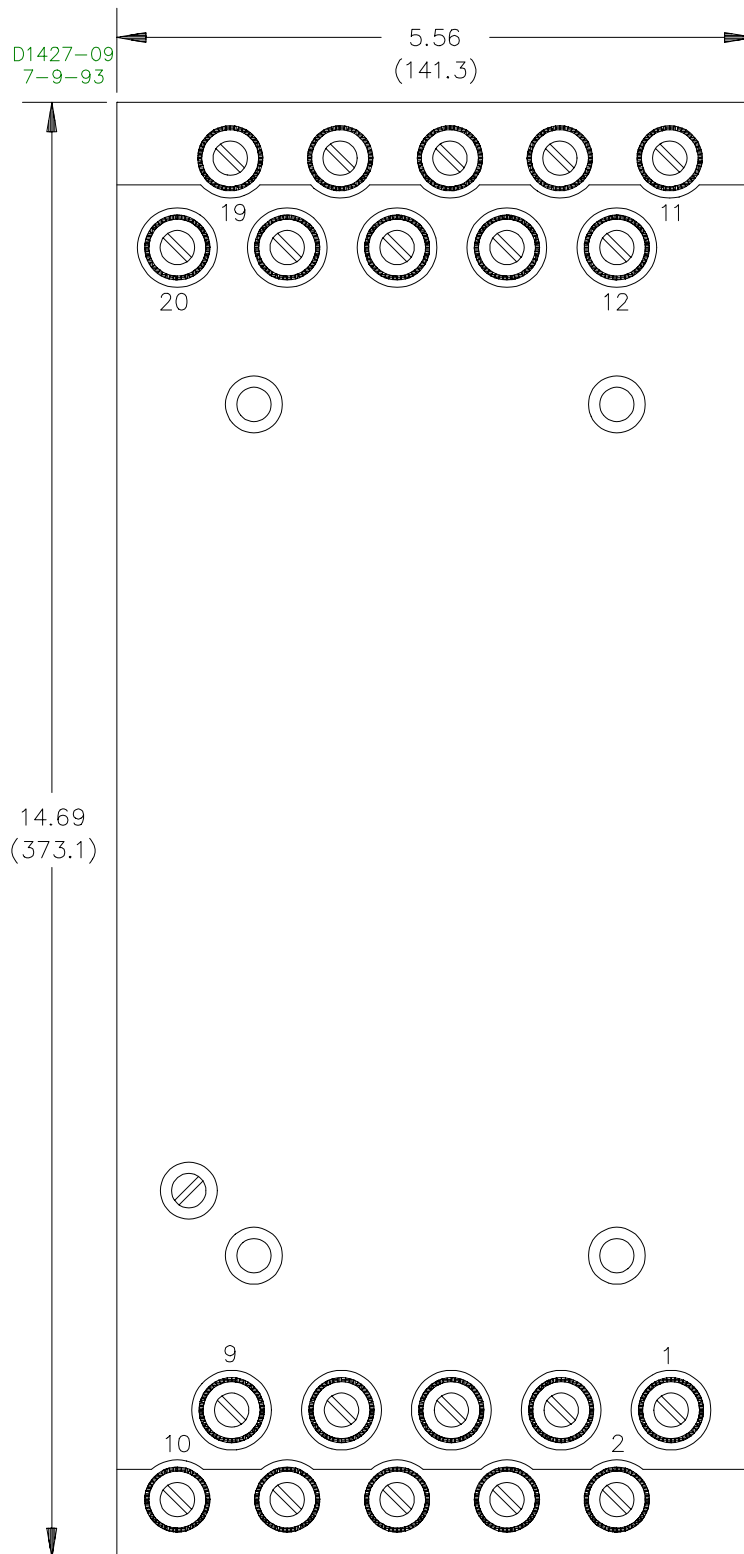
M1 Case, Projection Mounting, Outline Dimensions, Rear View
